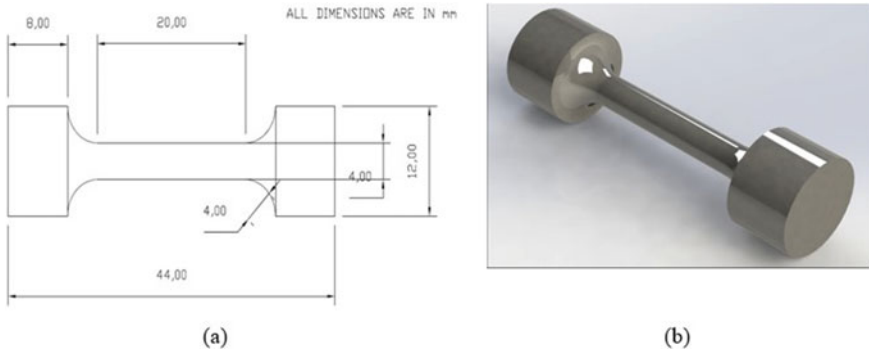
a 2D Drawing of Specimen as per ASTM b Specimen designed in Solid Works
